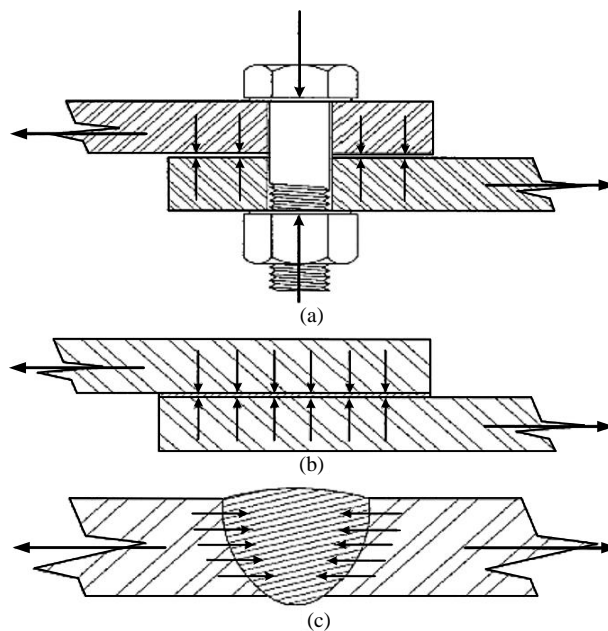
Three main classes of joints (a) Bolted joint, (b) Bonded joints (c) Welding [1].
